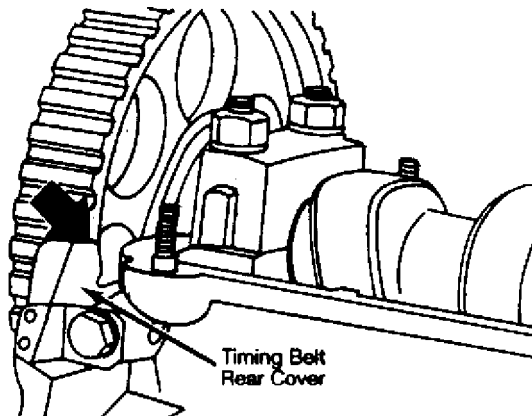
Camshaft Sprocket Positioning (Gasoline)
